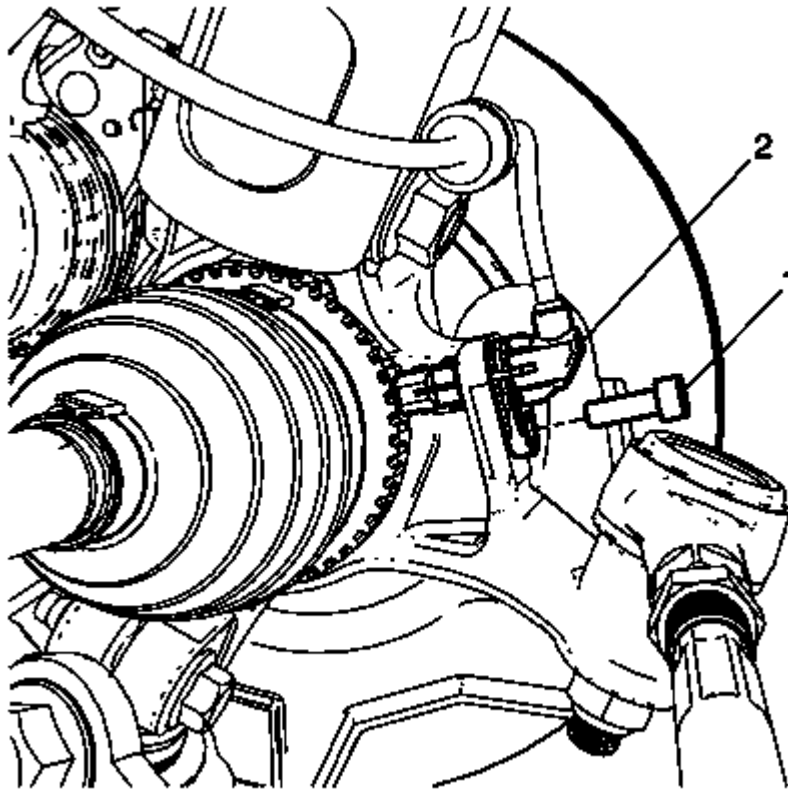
Wheel Speed Sensor And Knuckle Retaining Bolt
